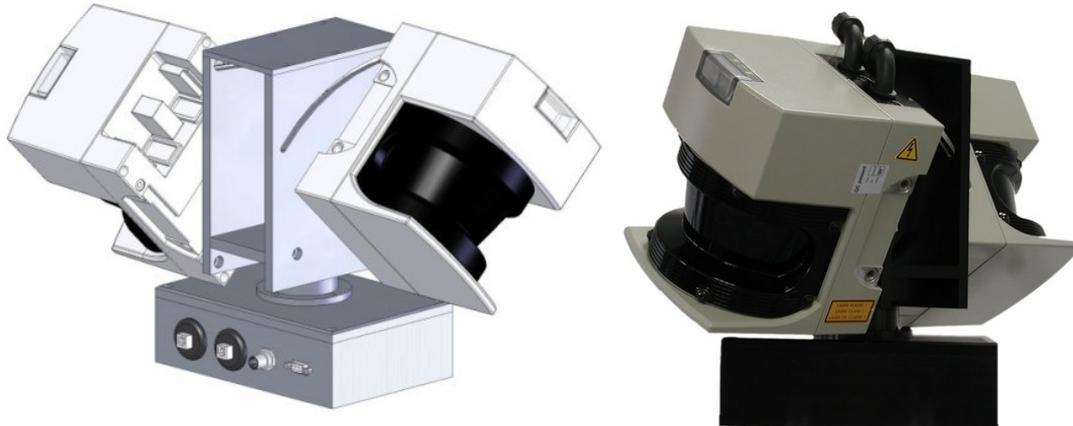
CAD drawing and image of the Fraunhofer 3DLS-K scanner
